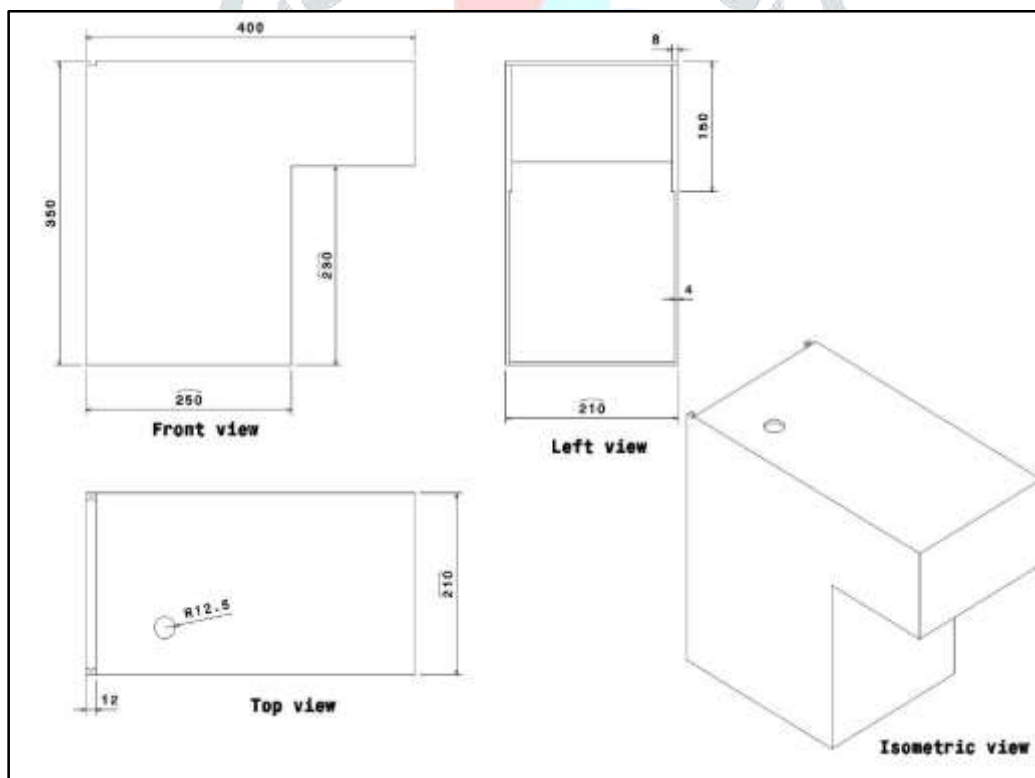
Dimensions of automatic hand sanitizer dispenser design
